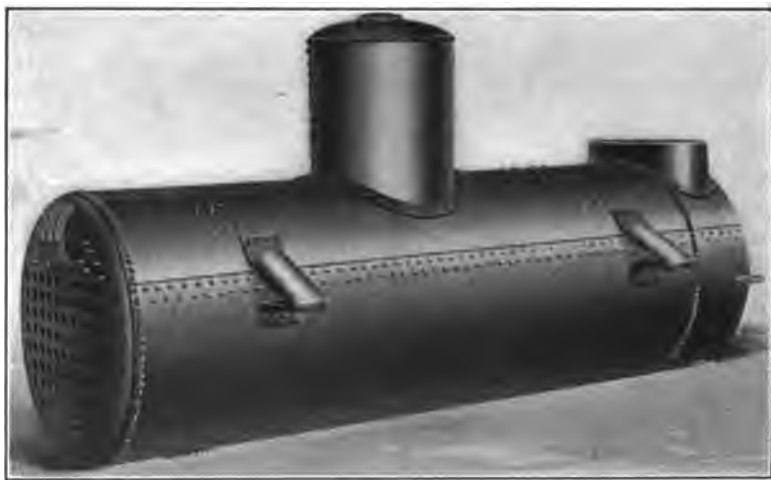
Horizontal tubular drilling or pumping boiler of the "California type."
